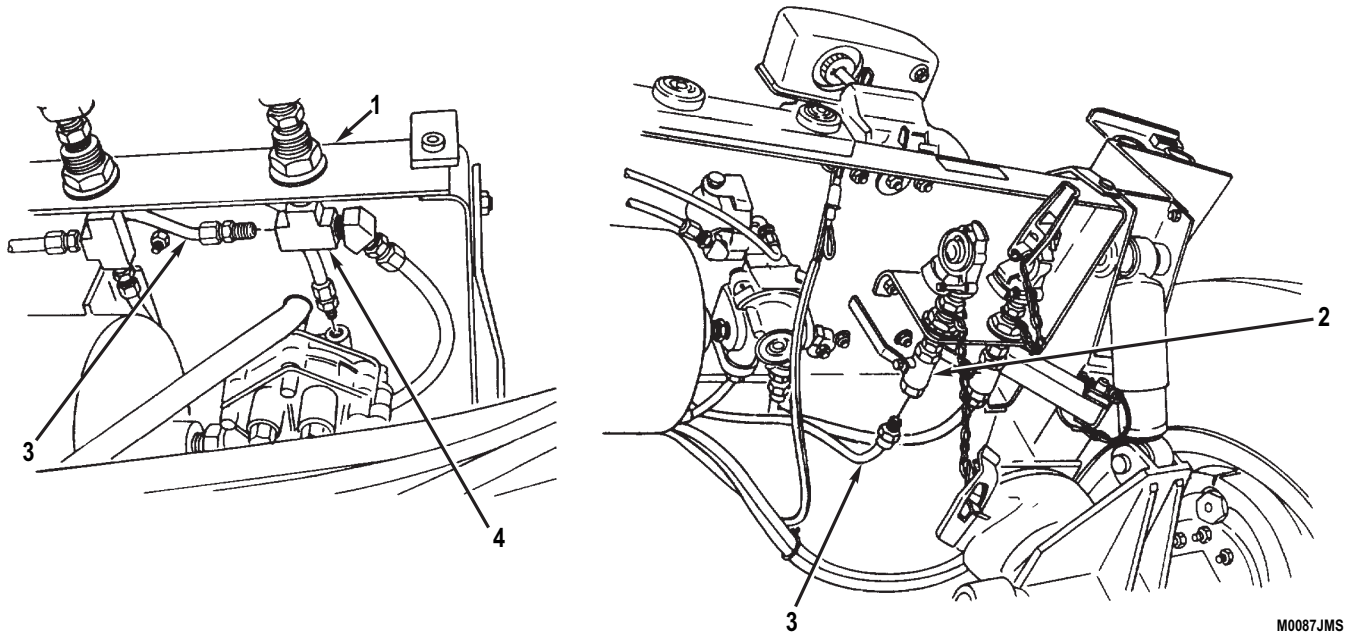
Emergency Shutoff Valve-to-Tee Tube Assembly Replacement.
